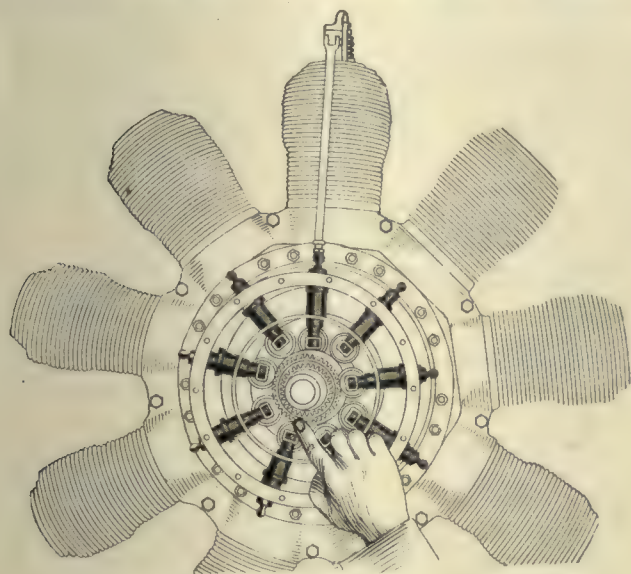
ASSEMBLING VALVES AND CAMSHAFT
